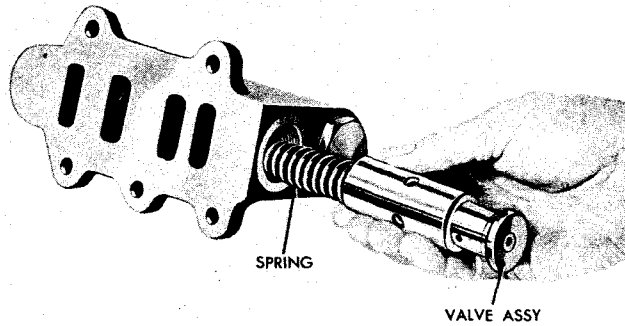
Removing or installing main pressure regulator valve assembly and spring
